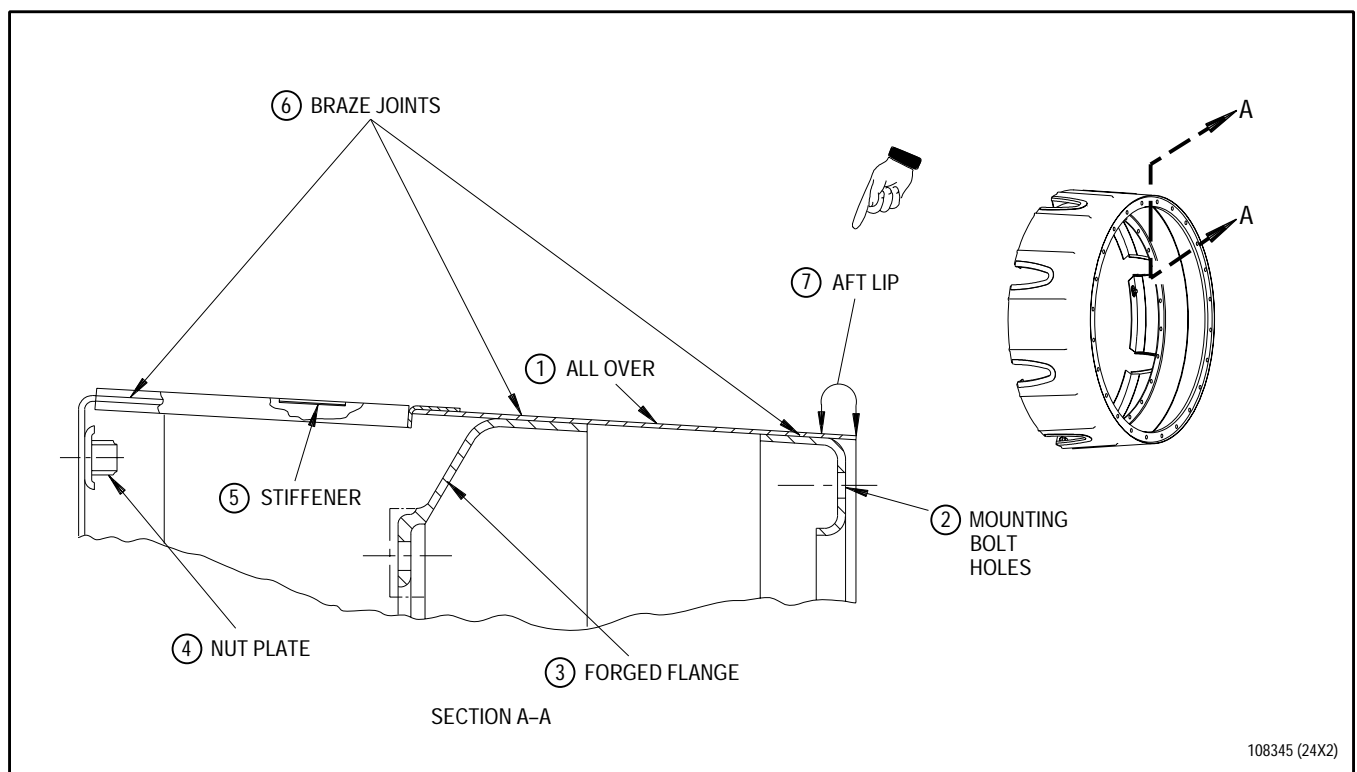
Turbine Exhaust Duct (Rear) Assembly - Inspection
